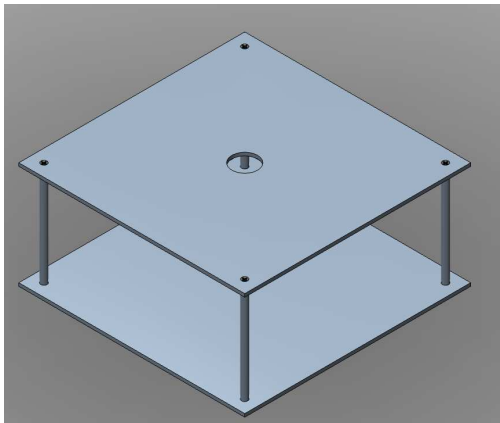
Model of the chassis base showing the assembly of the base plates and rods.
